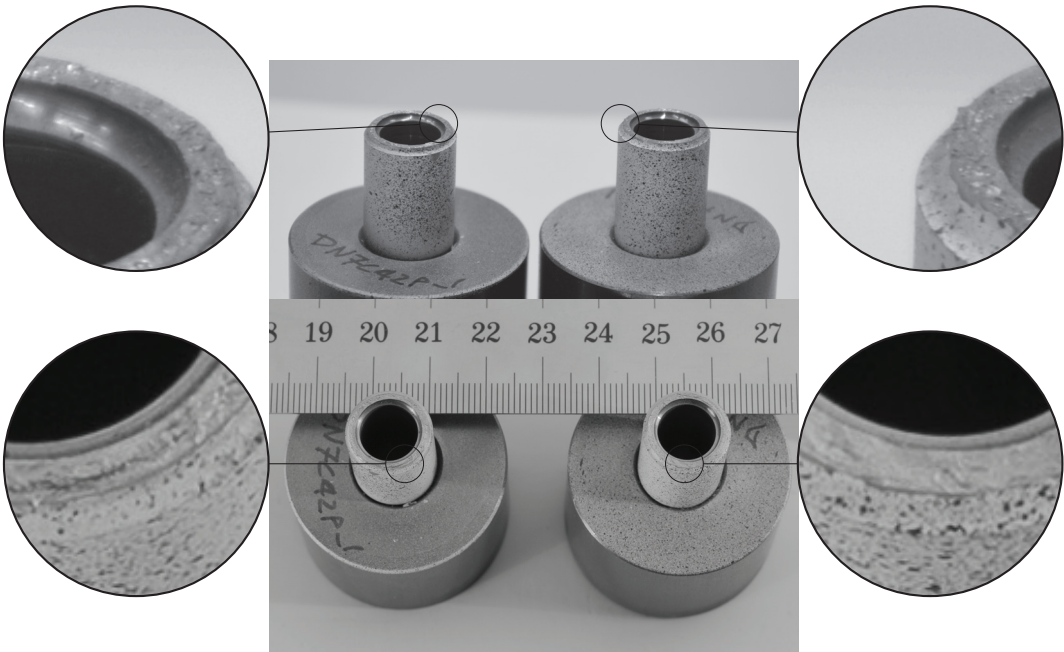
Fracture surface in cyclic for load path 2 in double notched specimens
